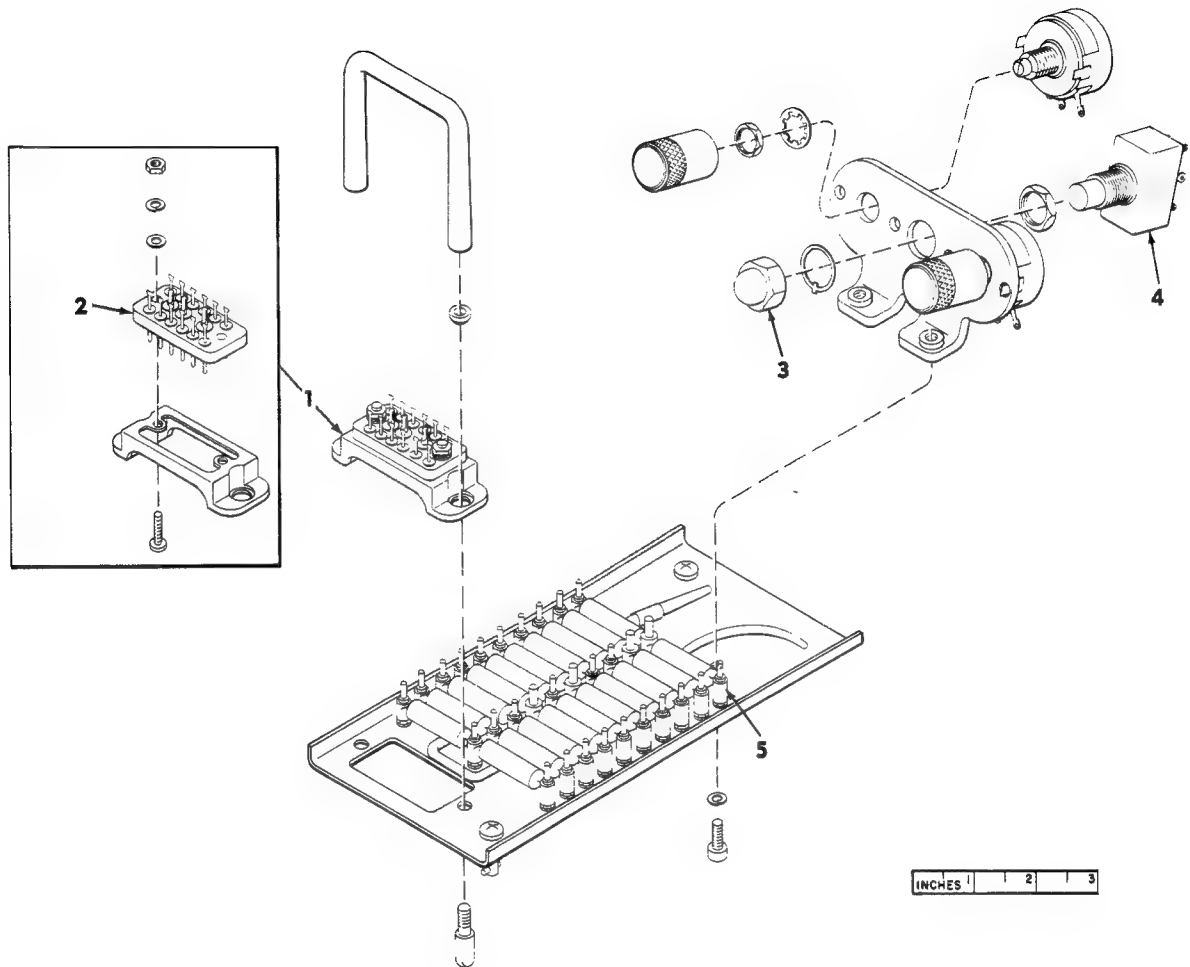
Amplifier, electronic control (9005495)—partial exploded view
